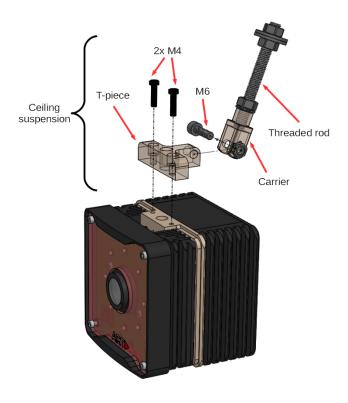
Attaching the ceiling suspension to the ARTTRACK5 camera
